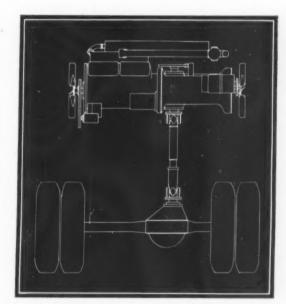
Axle and transmission shafts are parallel in this type of rear-engine drive
